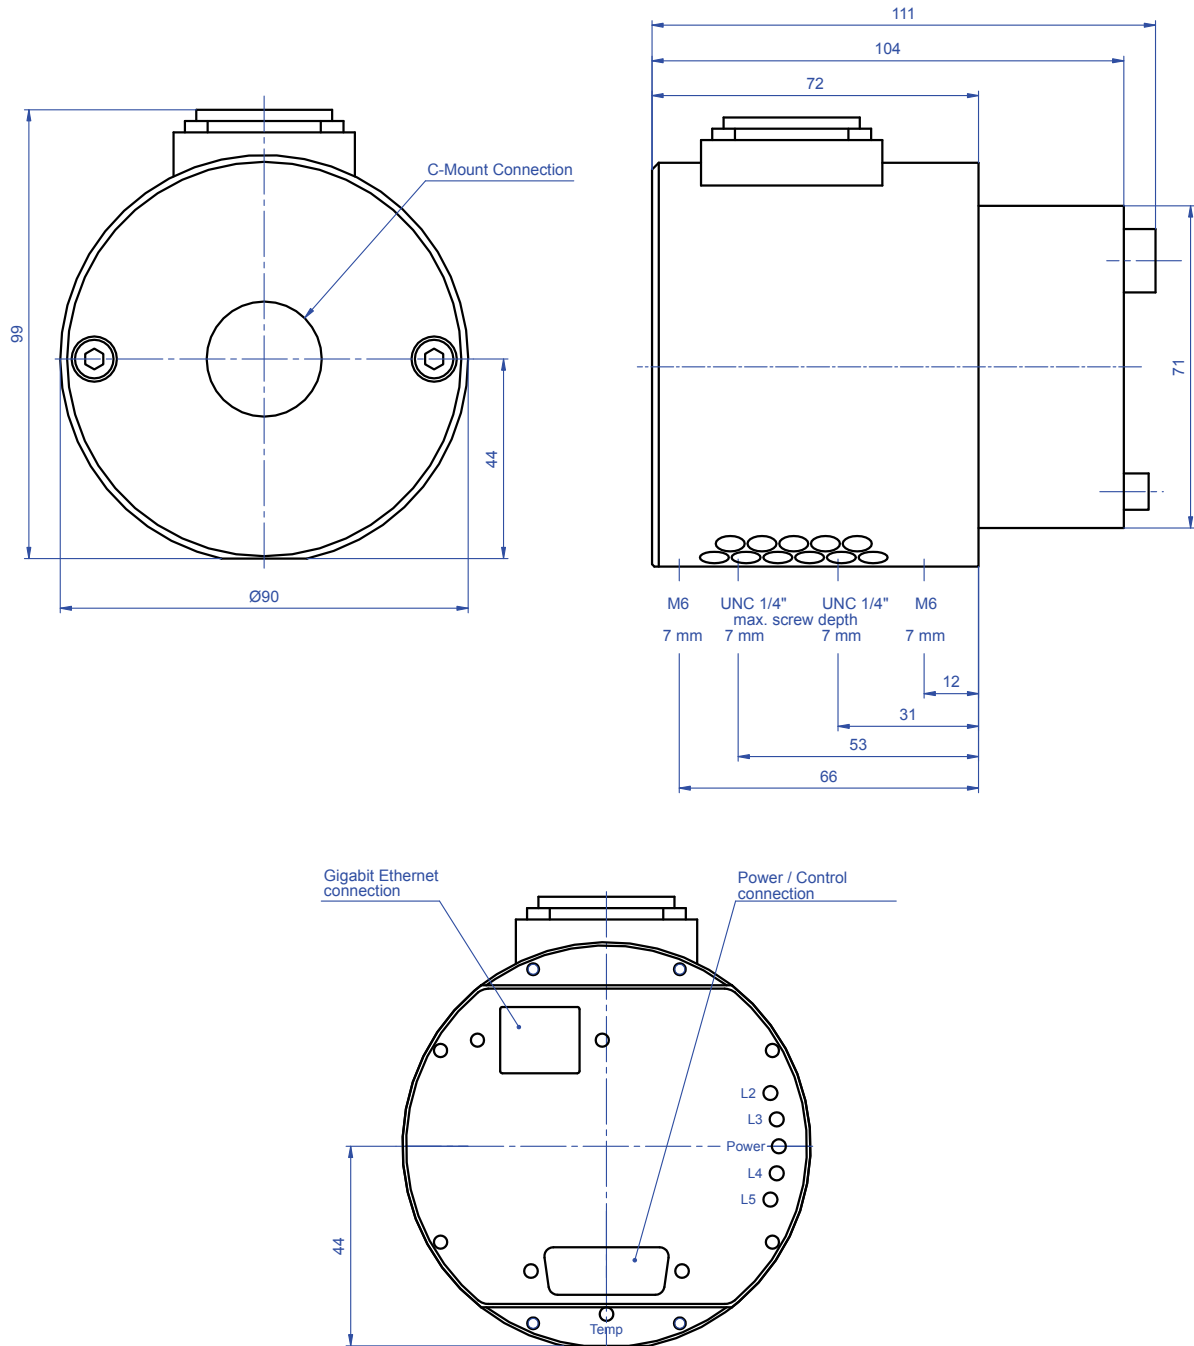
Camera dimensions: Bigeye P-132B/C Cool and P-132B Solar Cool (front/side/back)
